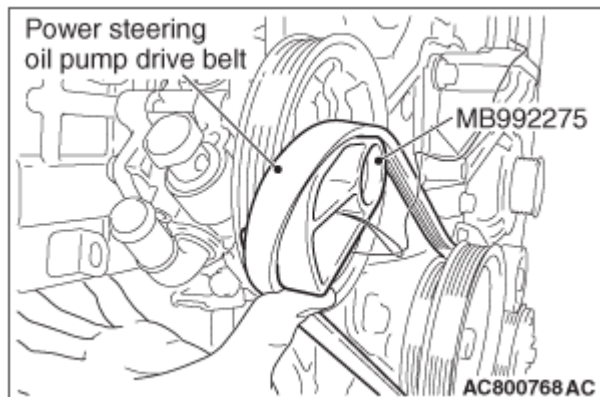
Installing Power Steering Oil Pump Drive Belt Using Special Tool MB992275
